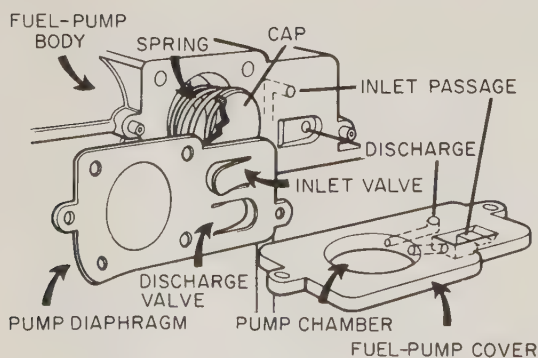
Partial disassembled view of a diaphragm carburetor showing the details of the pump diaphragm. (Briggs & Stratton Corporation)
